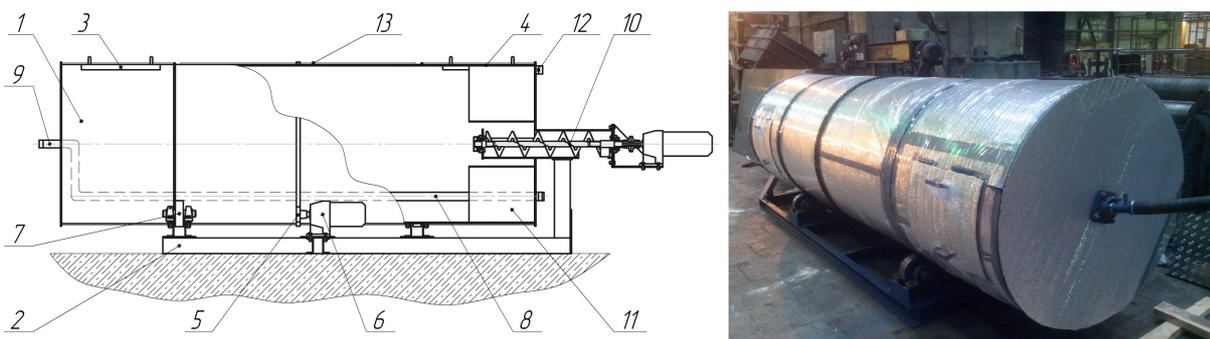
Breadboard model of an experimental biofermentation installation of the drum type: 1 – rotating cylindrical drum; 2 – frame; 3 – charge hole; 4 – checking hole; 5 – power unit; 6 – motor reduction unit; 7 – mounting assemble; 8 – aeration pipe; 9 – air duct for outside air supply; 10 – discharging auger conveyor; 11 – blades; 12 – exhaust duct; 13 – heat insulation
